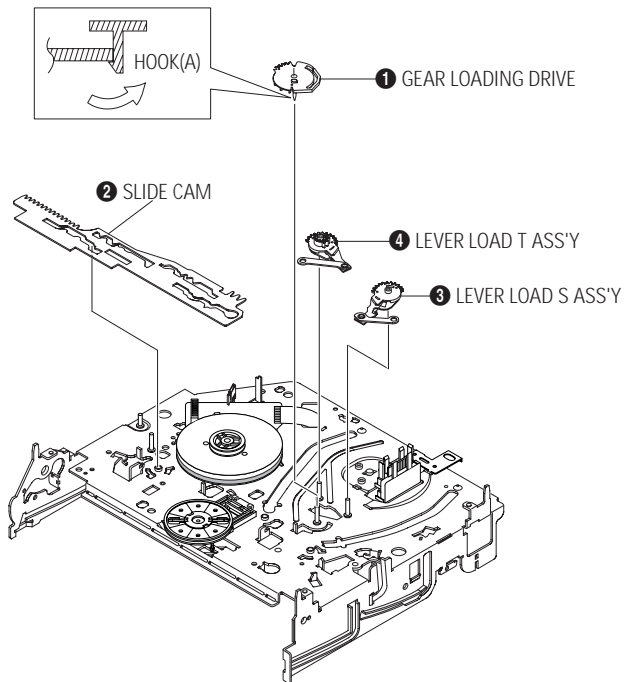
Gear Loading Drive, Slider Cam, Lever T, S Load Ass'y Removal
